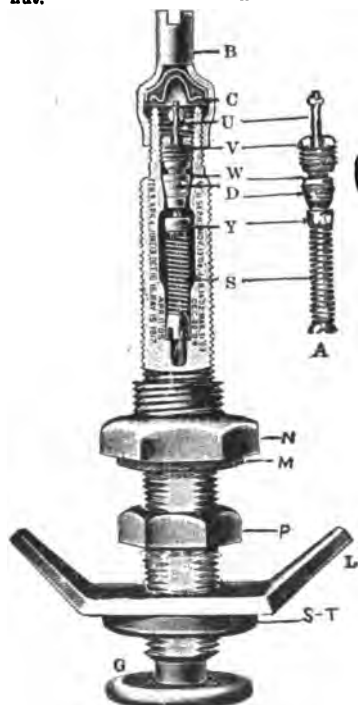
Schrader No. 777 inner tube valve; full size for 8 in. tubes and under. No. 725 for 8 1/2 in. and over is larger.
